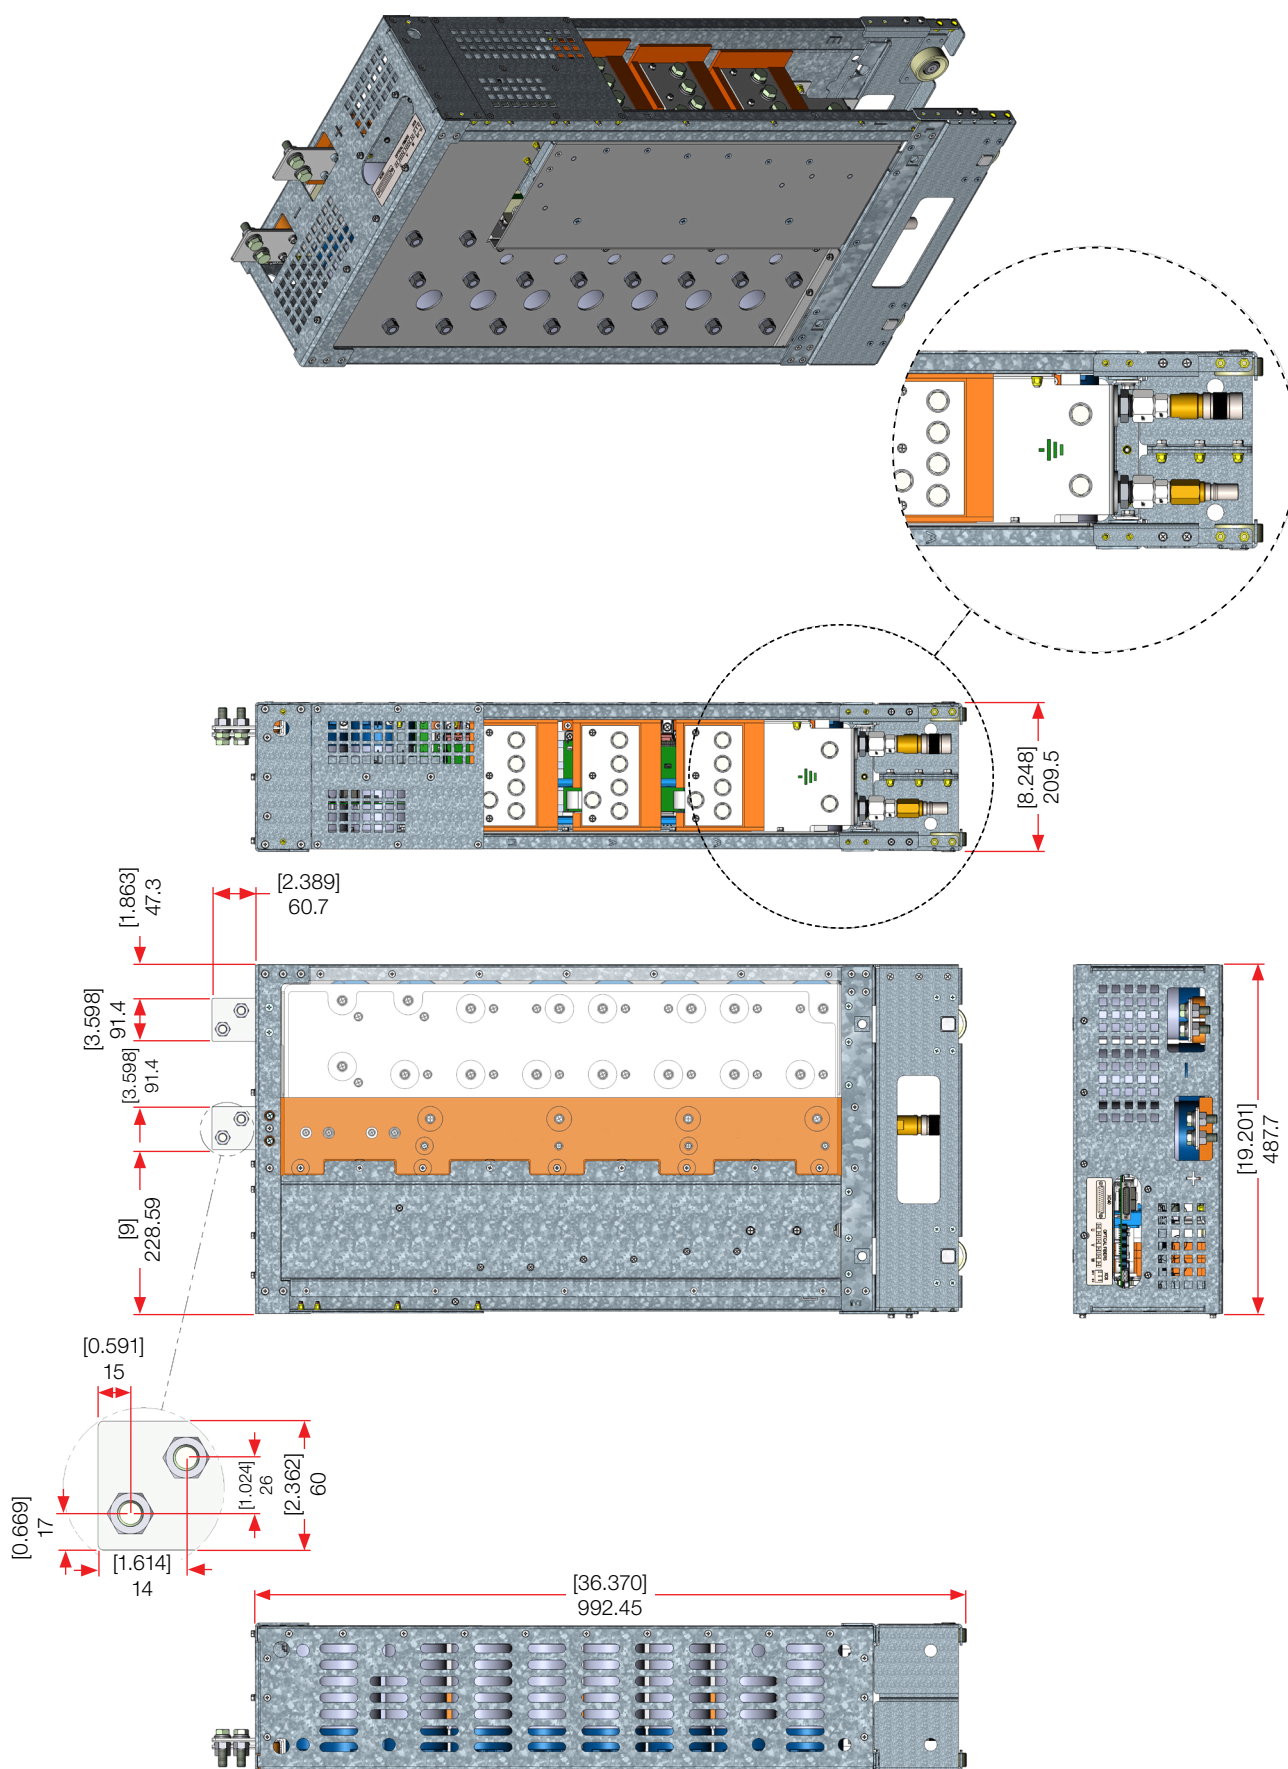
Mechanical dimensions of the UP11W G2 with quick couplings in the hydraulic fittings in mm [pol]
